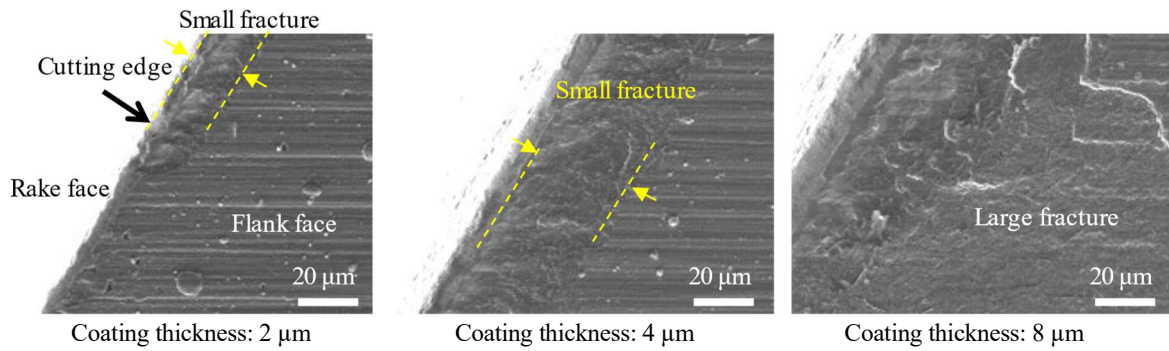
SEM observation images of the coated cutting edges on the flank face after machining of Ti-6Al-4V alloy. TiN coated end-mill tools, cutting speed $V = 60$ m/min, feed rate $f = 0.04$ mm/tooth, $a_p = 6$ mm, $a_e = 0.3$ mm, cutting length $L = 1$ m, coating thickness: 2 μm, 4 μm, 8 μm respectively.
